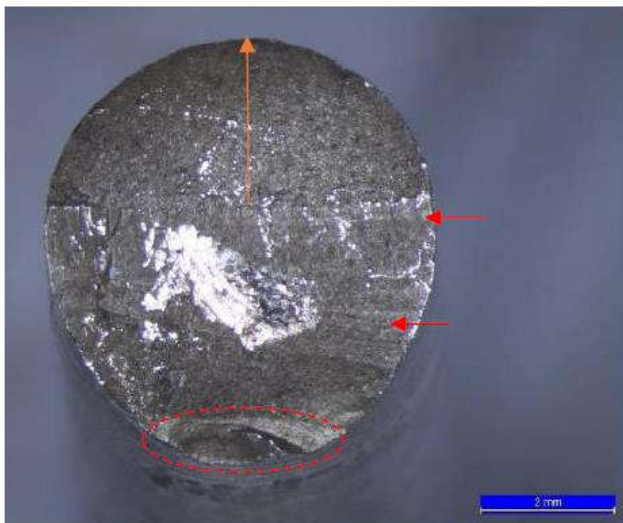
drive bolts located at no. 2 and 5 on the membrane pack, highlighting the area of crack initiation (red circle) and clamshell marks (red arrows) which indicate fatigue crack propagation.
